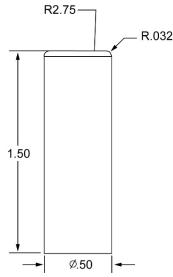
Sample small panel projectile. Length and diameter vary depending on test specimen thickness and material. Dimensions in inches.
